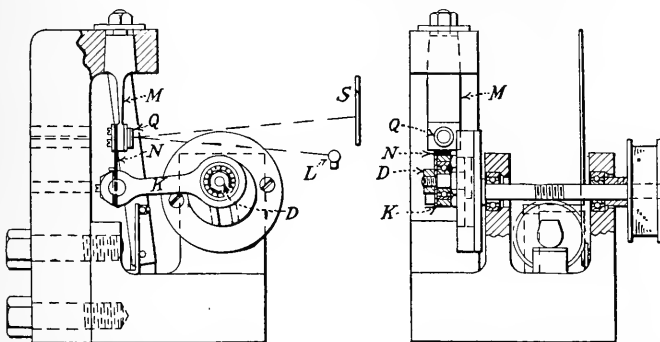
Repeated-flexure spring-type testing machine for thin flat specimens.
